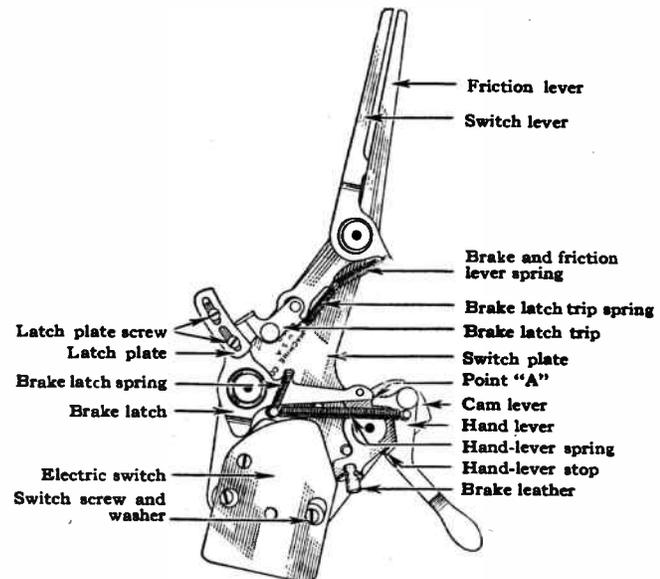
DETAILED VIEW OF THE AUTOMATIC SWITCH AND BRAKE.
